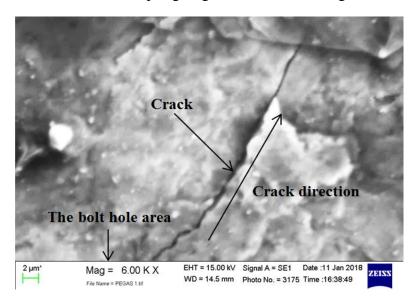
Fracture surface spring shows crack area marked with iniation crack
